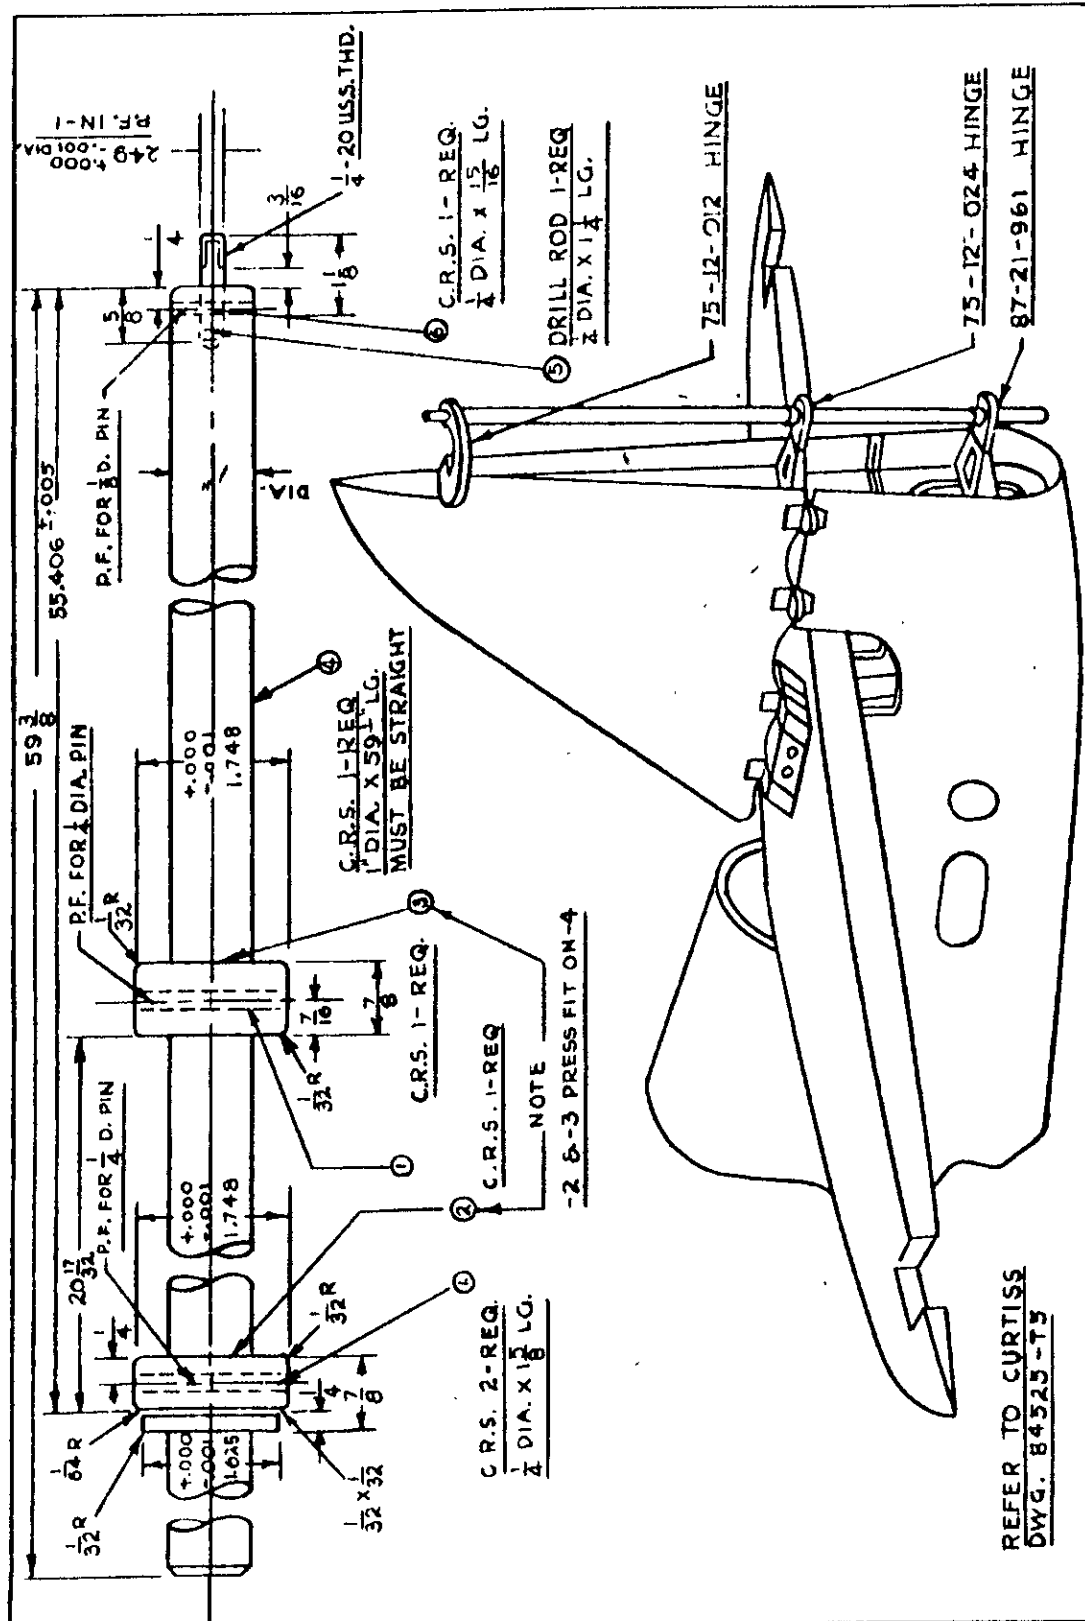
A - Rudder Assembly Locating Fixture - Extended Fuselage
